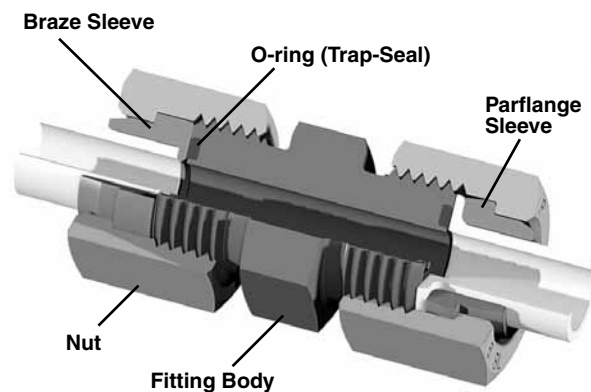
Seal-Lok Union cutaway with flanged and brazed assemblies
